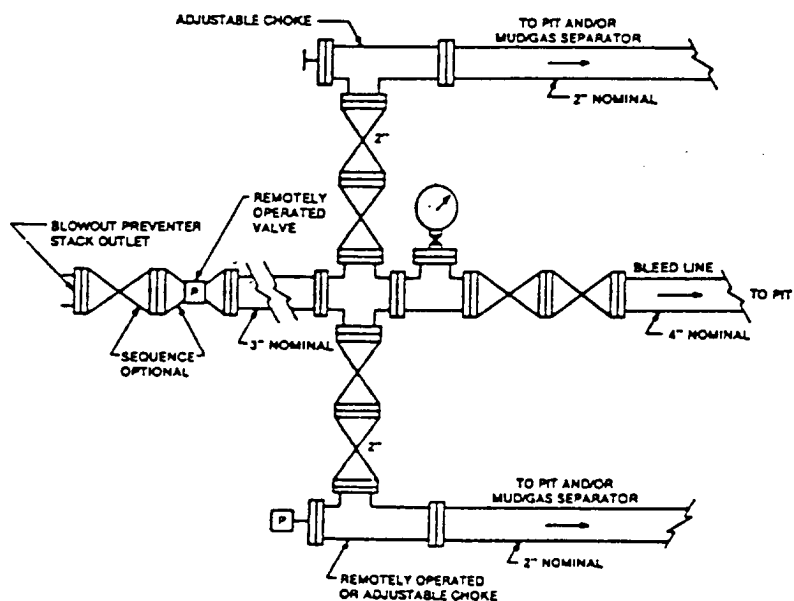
Typical choke manifold assembly for 5M rated working pressure service — surface installation.
